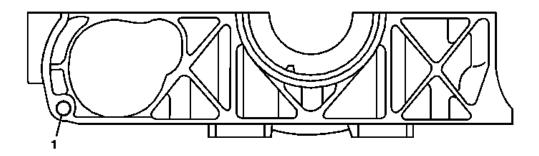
Identifying Bolt Size & Locations On Engine Block - Top Courtesy of GENERAL MOTORS CORP.
